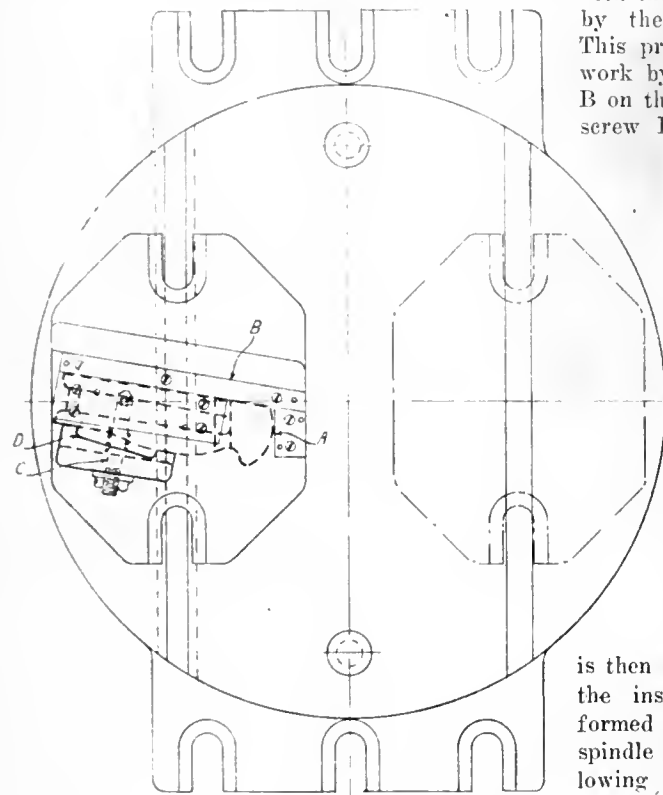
MILLING SIDE OF HILT USING TWO FIXTURES ON A TURNABLE
